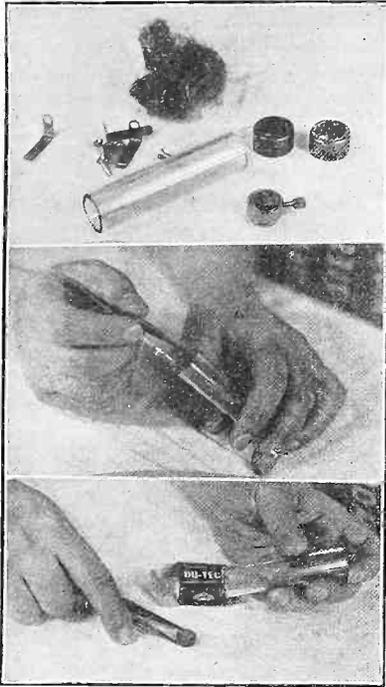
(top). The parts required for making a fixed crystal detector are: One piece of steam gauge glass tubing; one crystal; small quantity of No. 00 steel wool; four clips for mounting; screws; two end caps taken from an old cartridge-type fuse. Fig. 2 (center). Fill one end of the tube with steel wool about half way. Fig. 3. Insert the crystal as shown.
